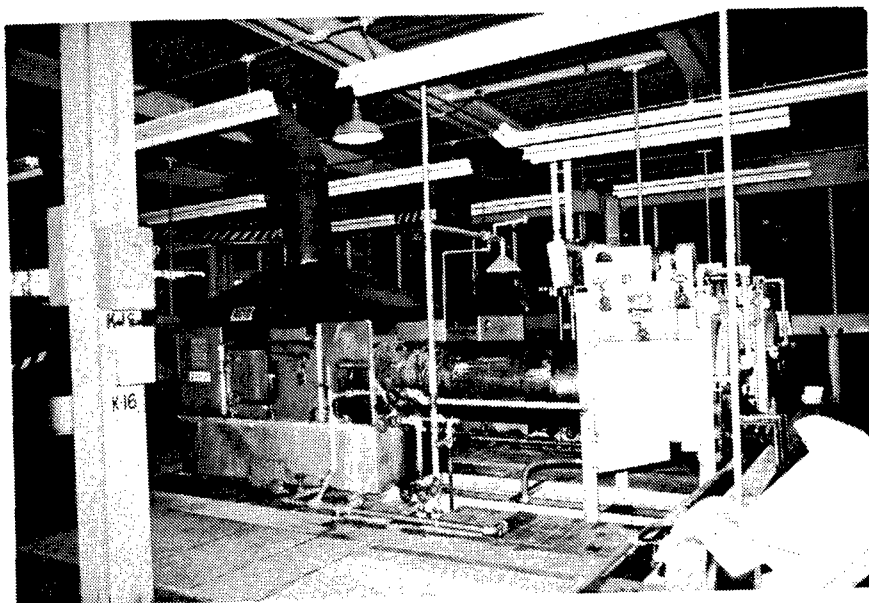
Building 102: Pickler Machine manufactured in 1941 by G.S. Blakeslee and Company.
